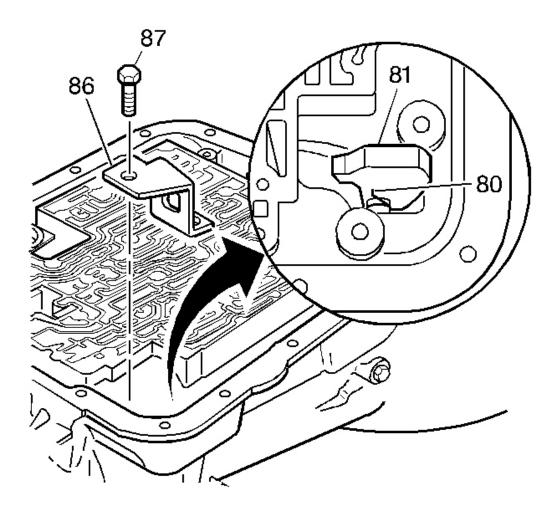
Locating Parking Brake Pawl & Return Spring Courtesy of GENERAL MOTORS CORP.
